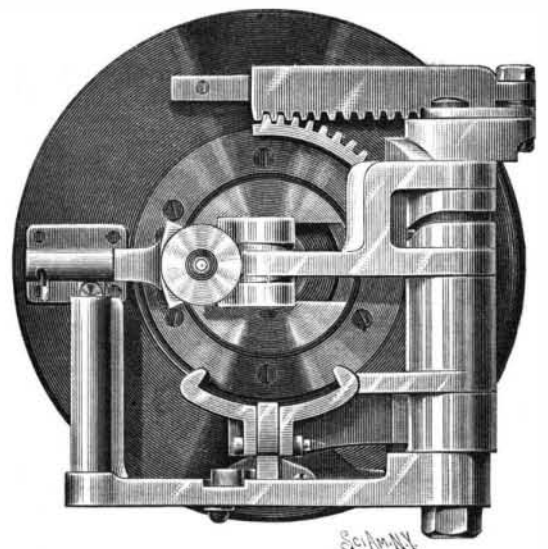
MODIFIED MECHANISM—REAR VIEW OF BREECH CLOSED.
